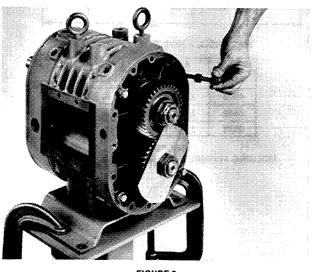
FOUR CAPSCREWS WITH SPACERS BEING TEMPORARILY REPLACED IN GEAR END PLATE
